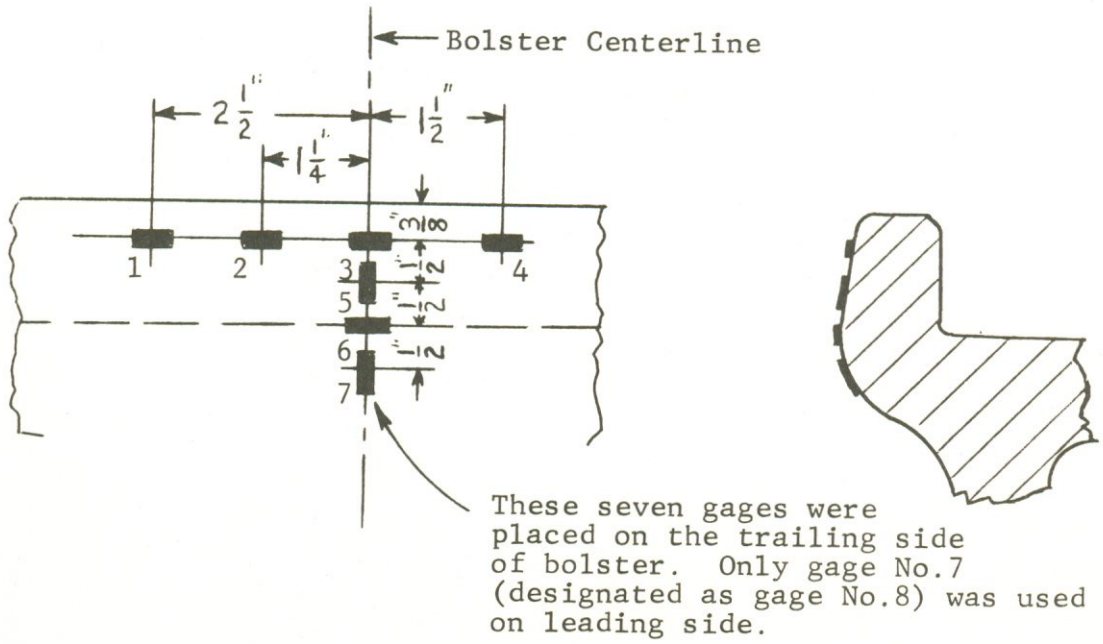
STRAIN GAGE POSITIONS ON SIDE OF BOLSTER
